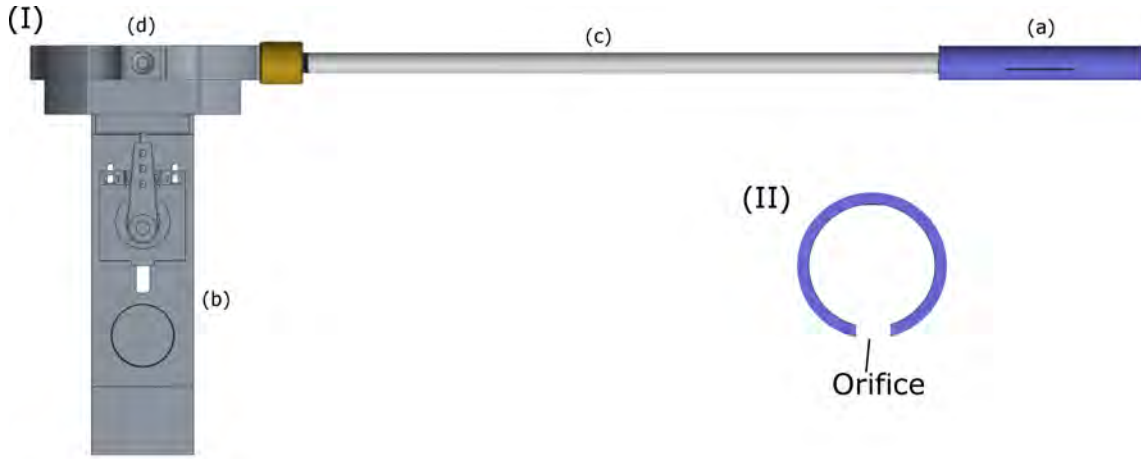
Synthetic jet actuator drive I and the cross-section of cylinder II, where: I(a) is the cylinder, I(b) is the SJA drive, I(c) is the Sting arm, and I(d) is the pumping chamber
